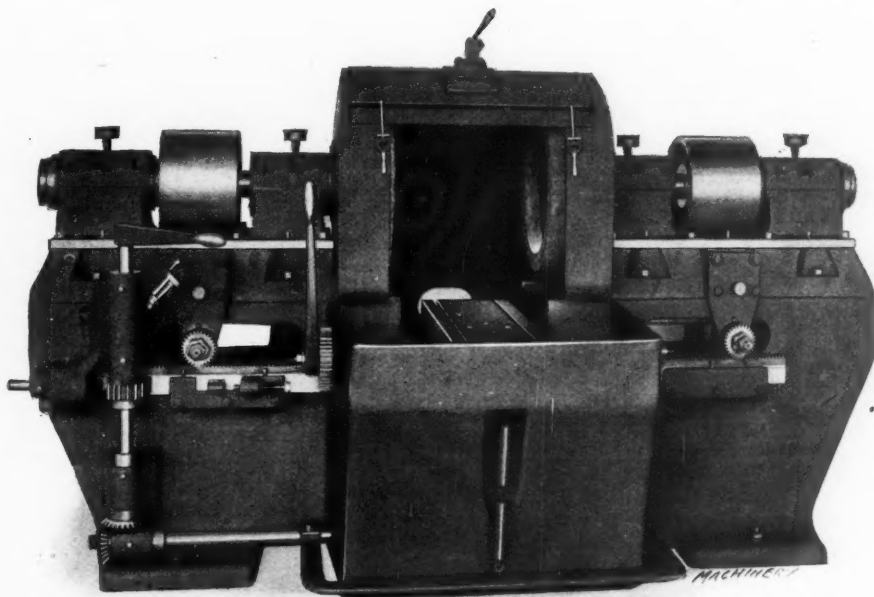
Front View of Gardner No. 15 Disk and Ring Wheel Grinder
